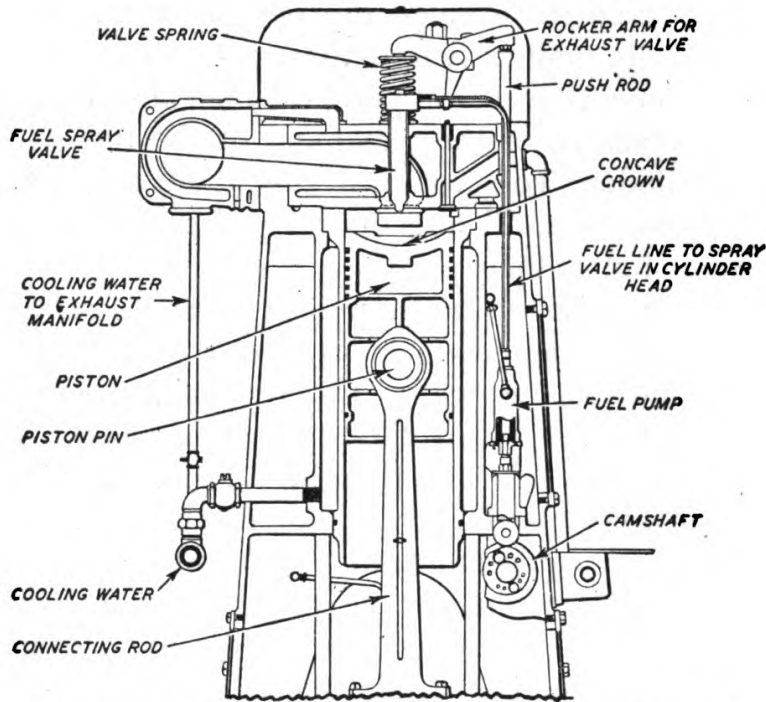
Piston with Concave Head Which Crowds Air Toward Center When Piston Approaches Top Dead Center
